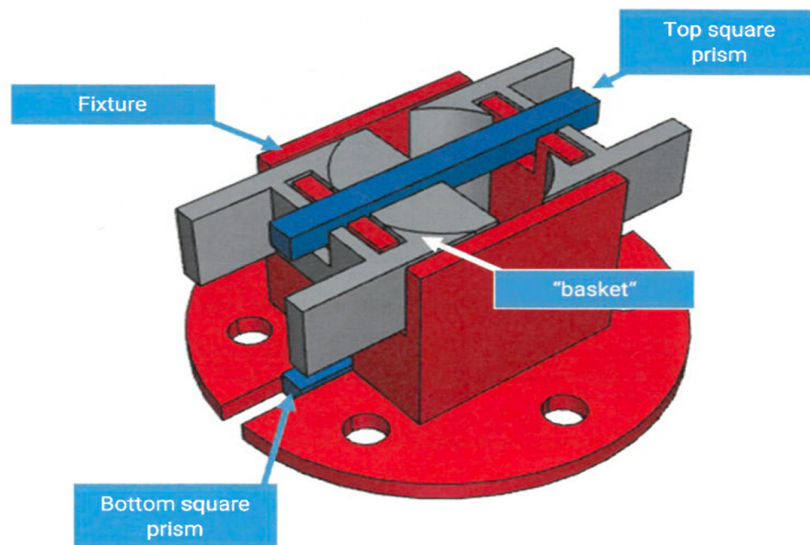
Post Irradiation Pullout Testing Showing the Test Fixture, the Test Specimen, and the LVDT Locations
